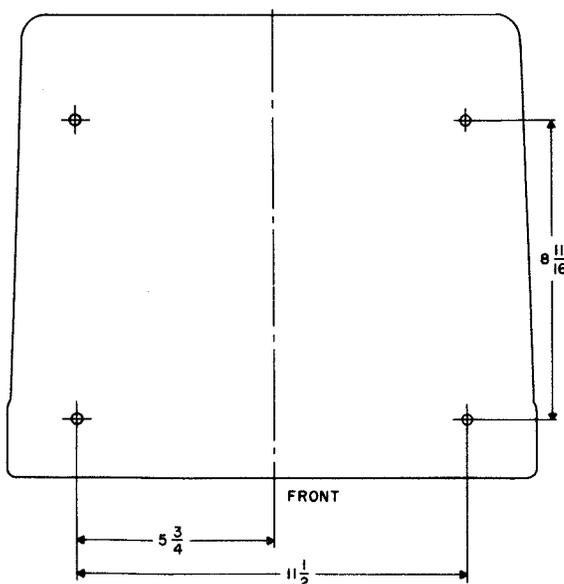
Tactical Case CY-2976/PG, Low Vibration Installation, Mounting Holes Location
